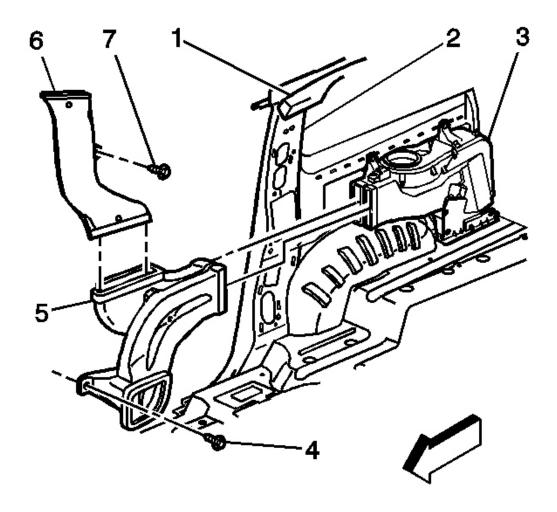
Removing/Installing Rear Ducting Courtesy of GENERAL MOTORS CORP.
